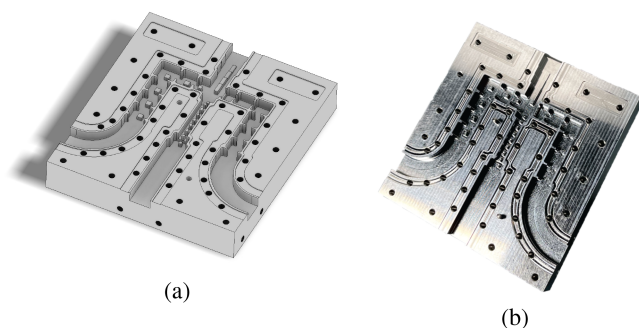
(a) Perspective view of the proposed multiplexer's inner channels and housing in CAD form, and (b) the fabricated multiplexer prototype in aluminum (no metallization is applied).
